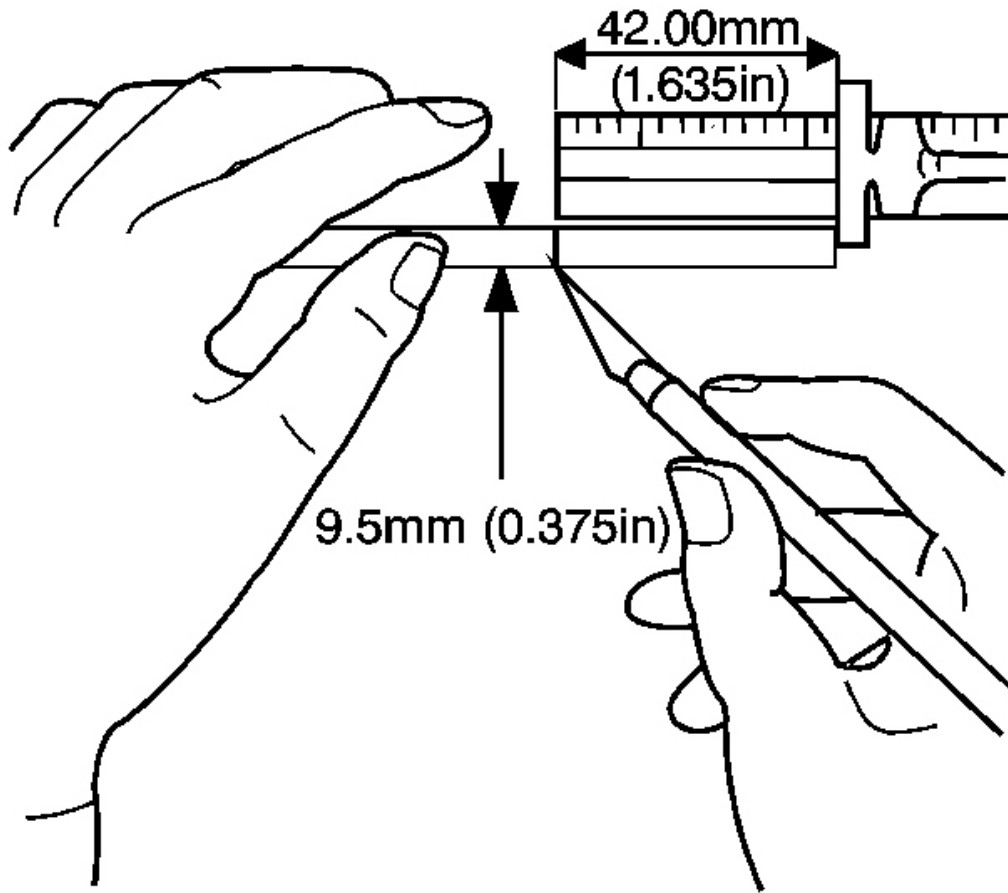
Scribing Mark On Rod For Gaging Proper Depth Of Third Accumulator Retainer And Ball Assembly
